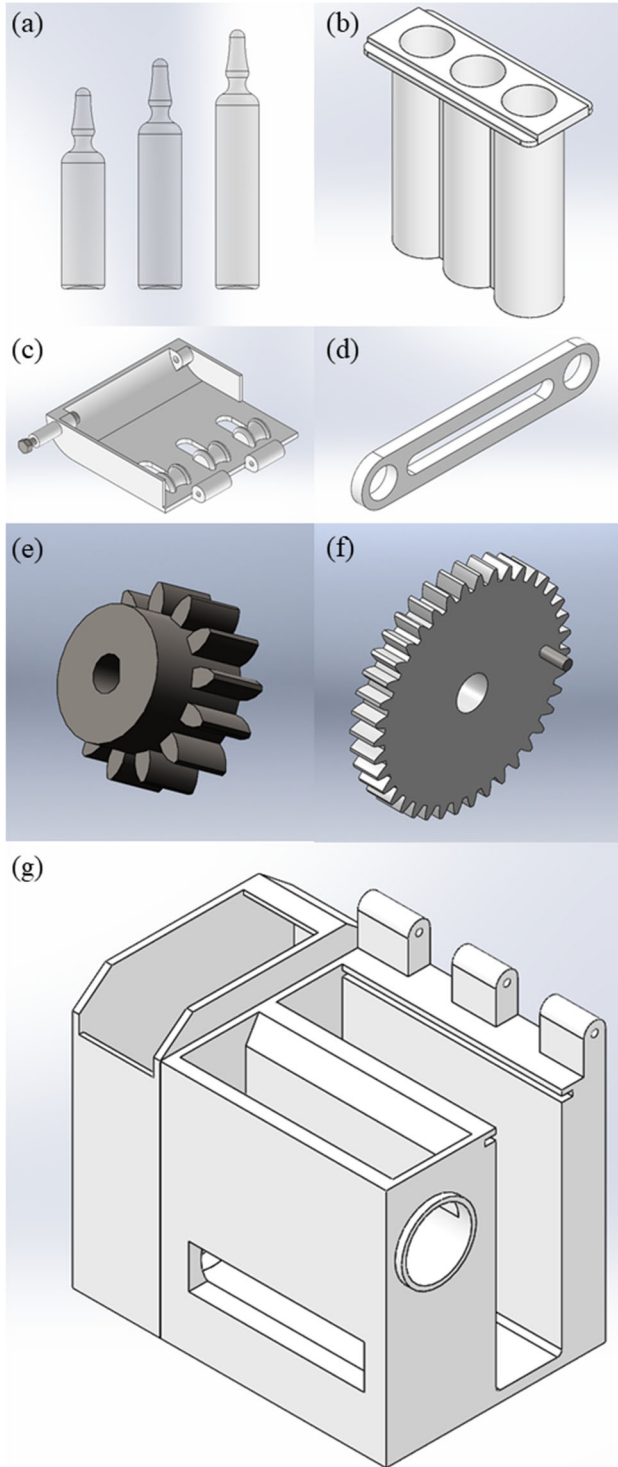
Component design for ampoule opening machine: (a) reference ampoules; (b) ampoule adapter; (c) opening cap; (d) connecting rod; (e) pinion; (f) driven gear; and (g) main structure.
